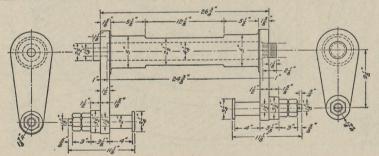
An incorrect drawing to be checked for errors (rocker arm).
